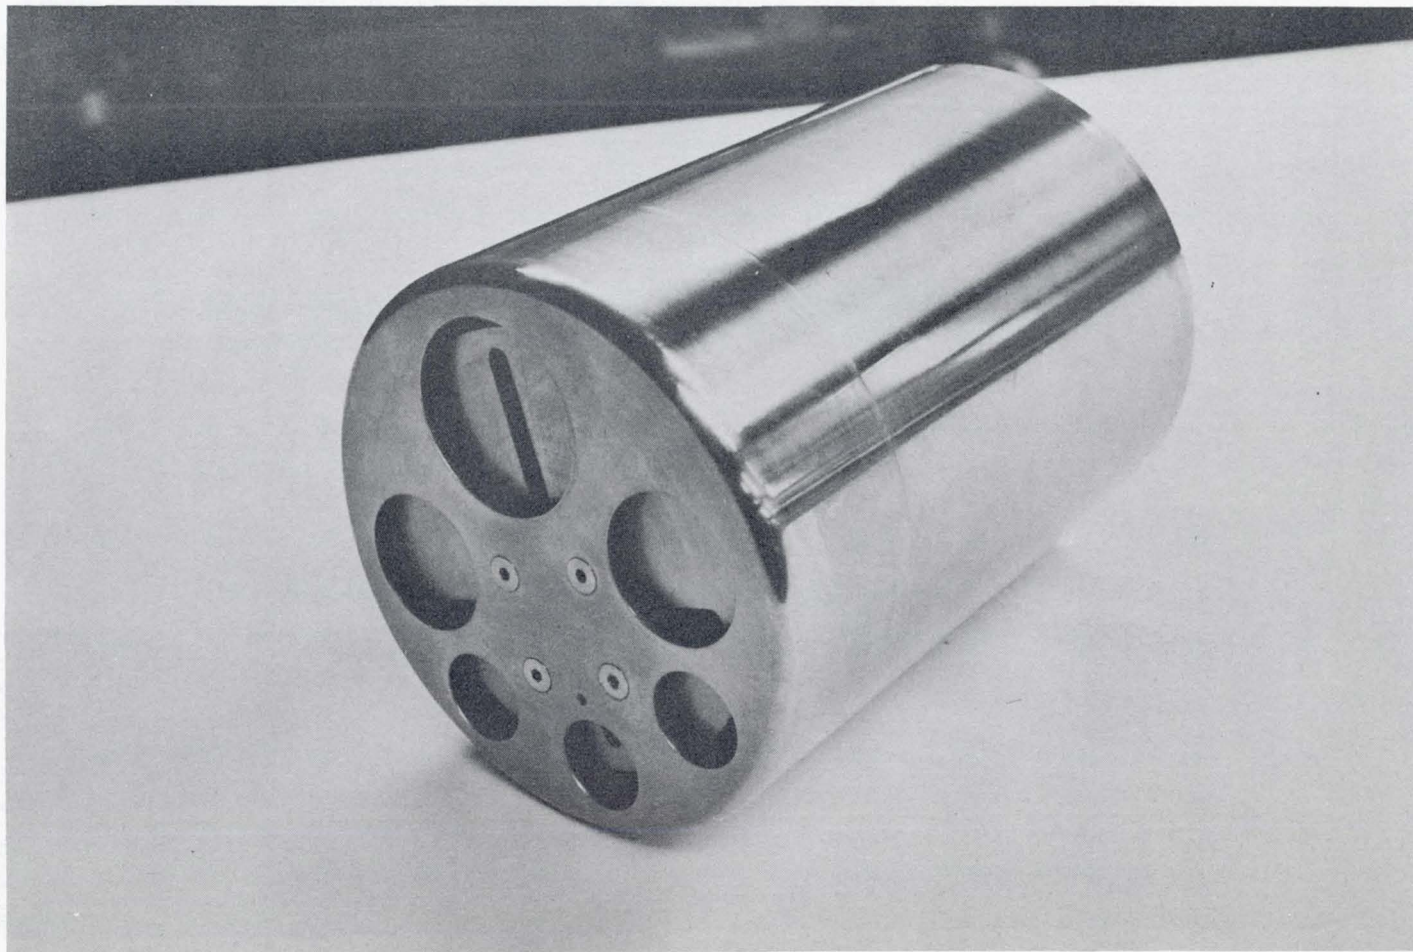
TEST LOOP HEAD ASSEMBLY
